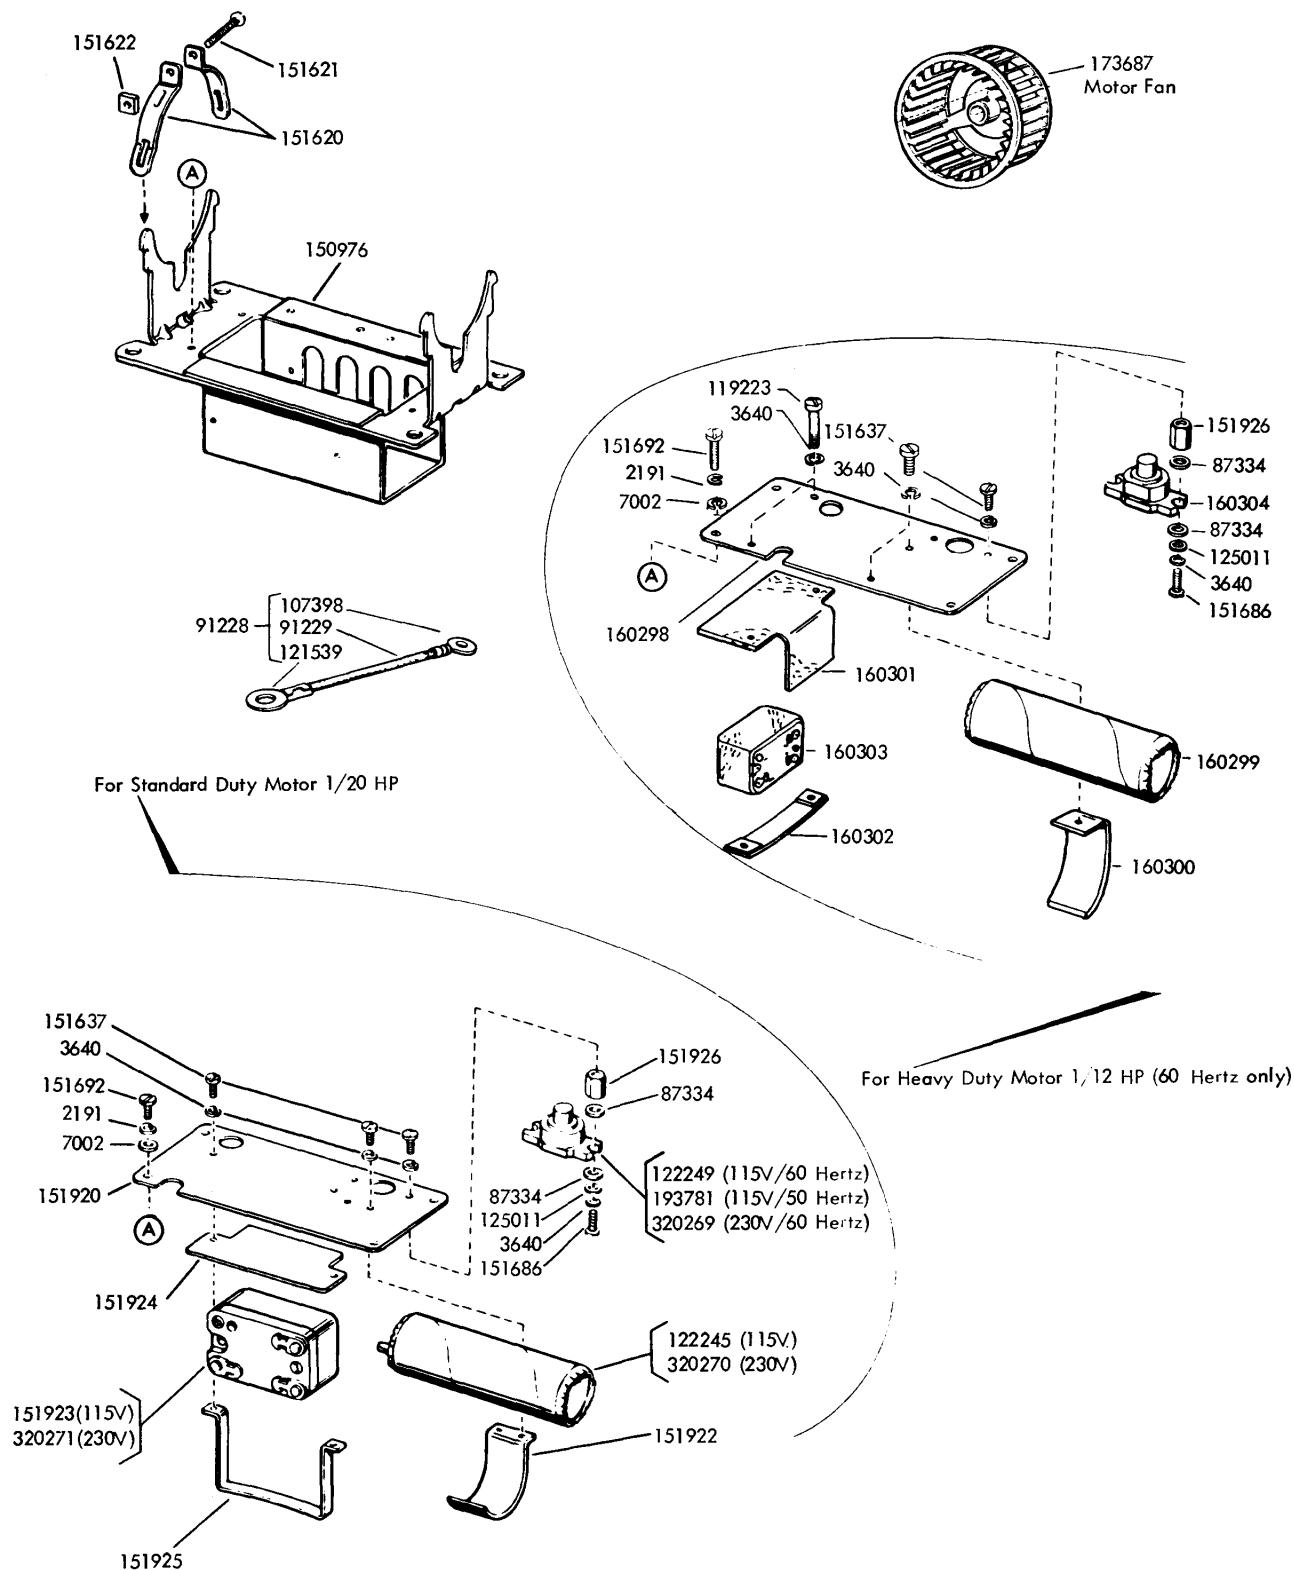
RELAY AND CAPACITOR MOUNTING (SYNCHRONOUS)
